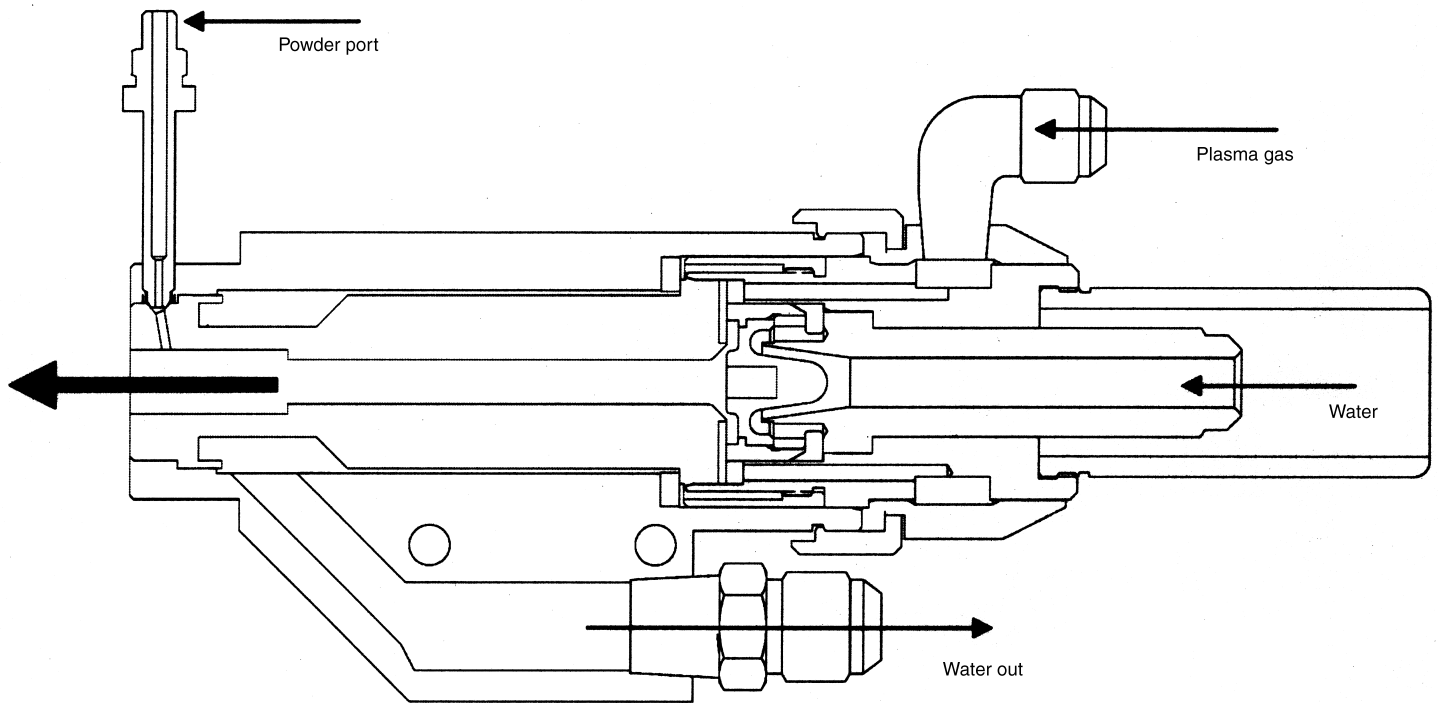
Single-plasma, extended-arc gun. Courtesy of Praxair Surface Technologies
